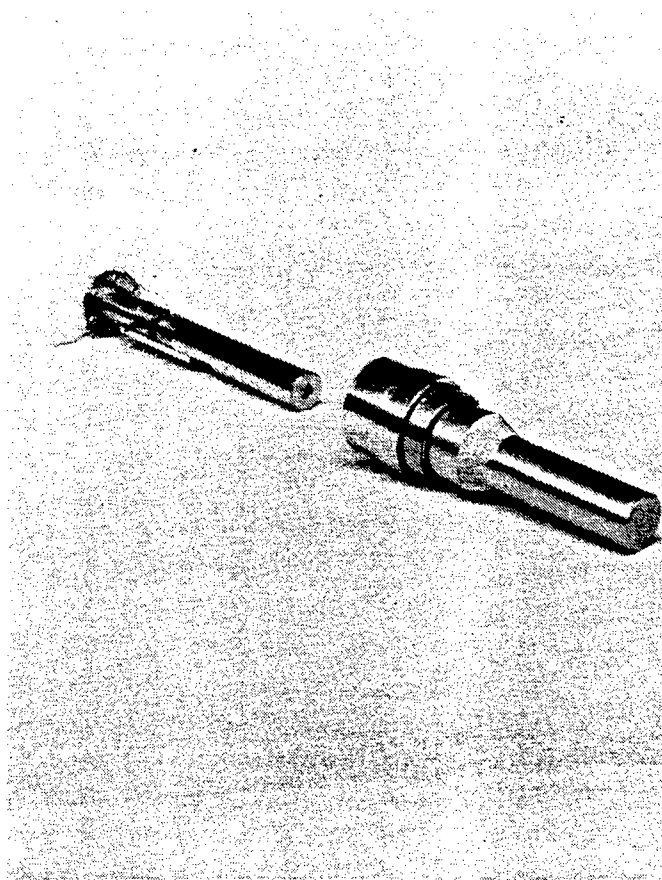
Pre-assembled geometry of guarded electrode subassembly mating with the tungsten button/heat choke subassembly.
